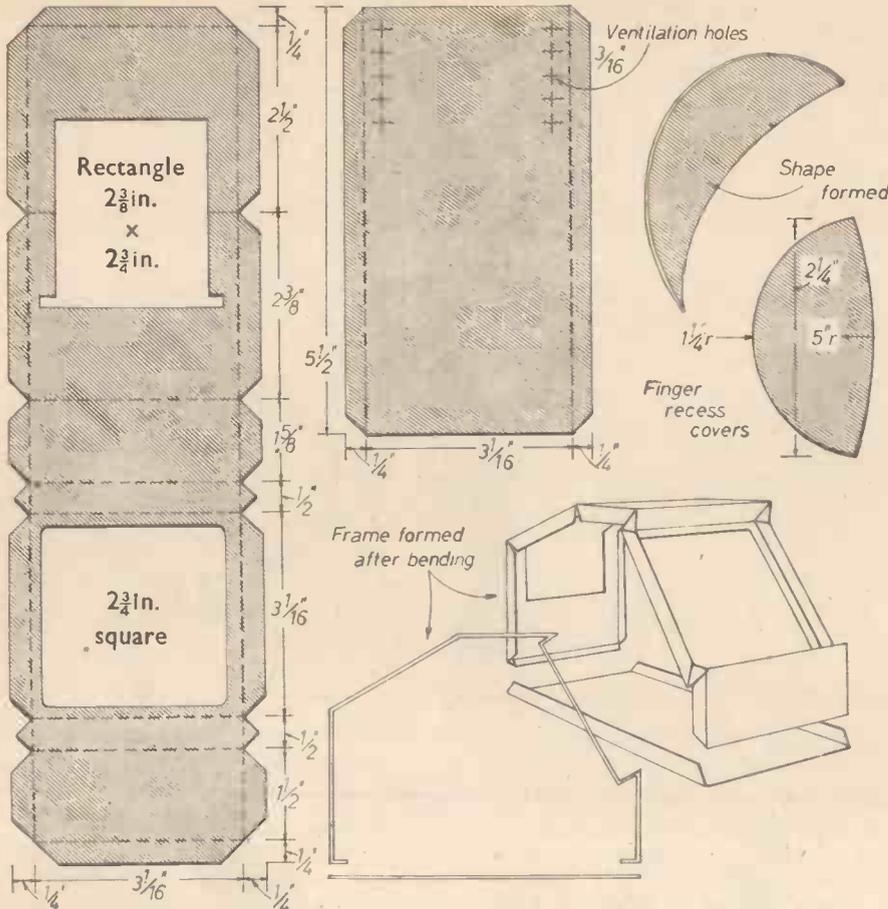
How to mark out and assemble the frame and base sections and form the finger recesses.
